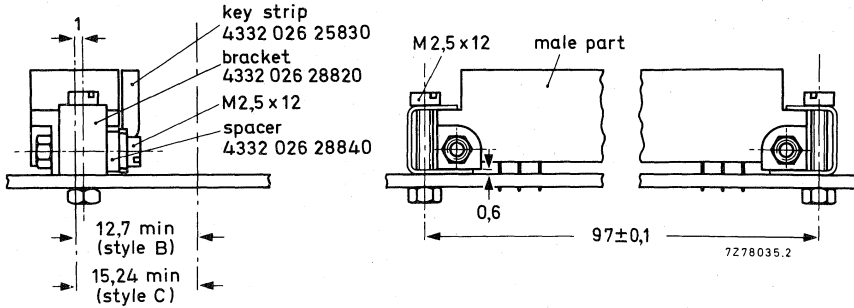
Key strip mounted to a male part with straight dip-solder pins.
